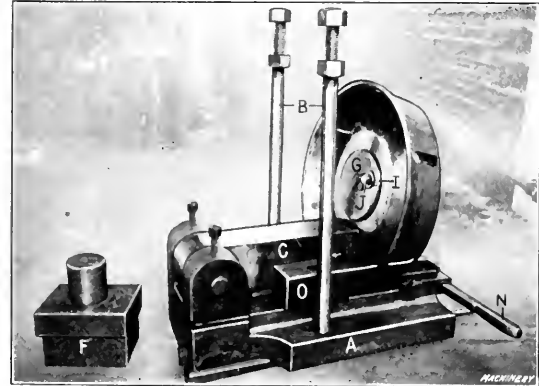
Fixture used in the Punch Press for cutting the Six Elongated Slots in the Rim of the Clutch Cone
